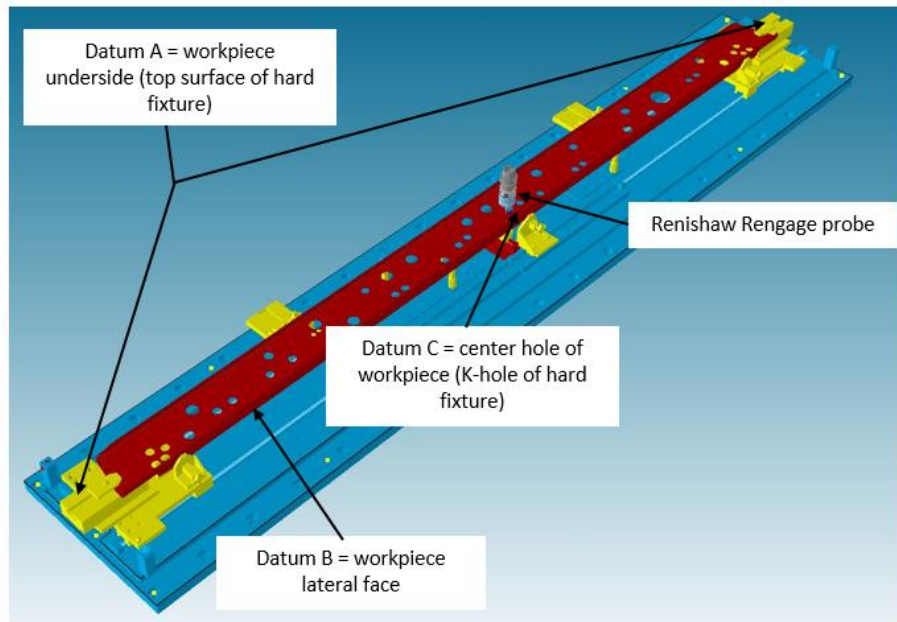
Schematic illustrating the arrangement of the machine bed of the Bavius CNC Machining Center. Milling floor of the hard fixture (blue), datums and clamps of the hard fixture (yellow) and a generic workpiece (red).
